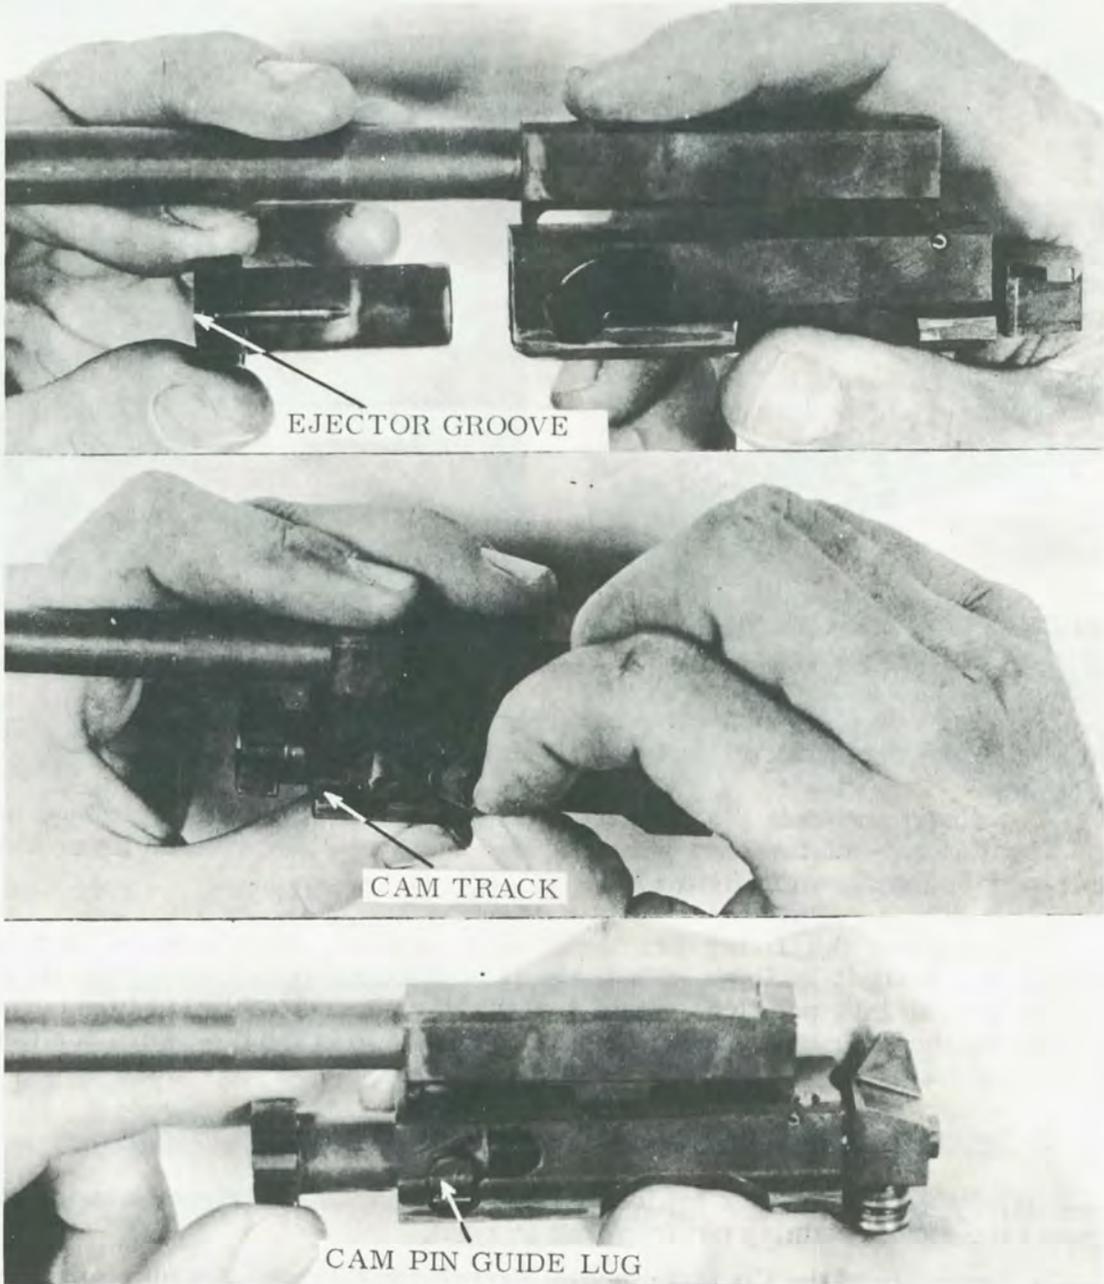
Replacing the bolt and cam pin in the bolt carrier.
